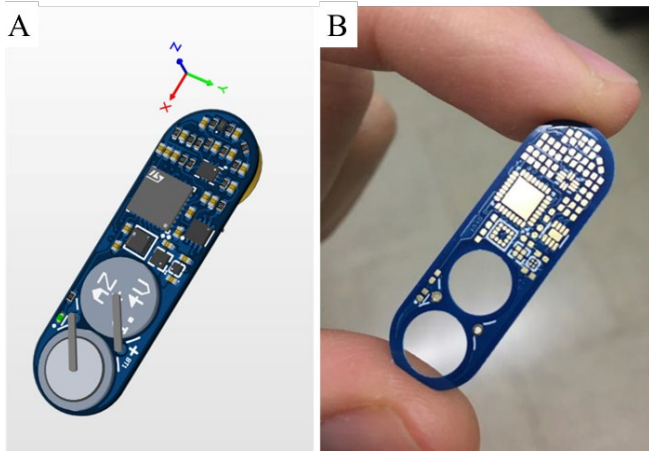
(A) SASES V2 bidirectional tag 3D model, and (B) the PCB manufactured, which have a size of 33.5x10x0.4 mm.
